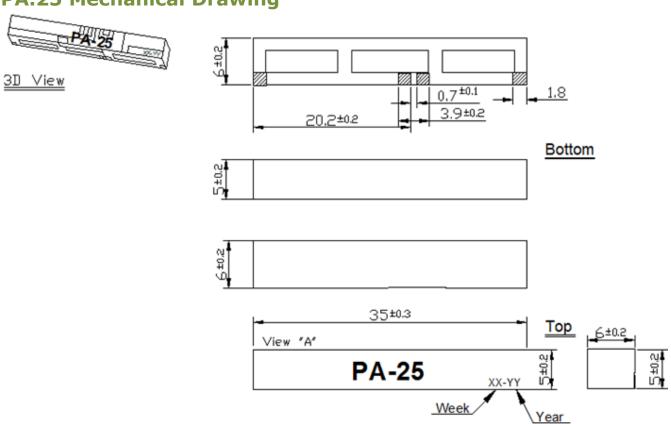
Mechanical Drawing of the PA.25 Antenna.
